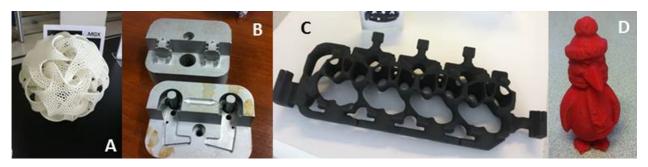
Examples of 3D printed products. (A) A complex decorative piece printed from nylon-11 material using laser based powder bed fusion. (B) Injection molding dies printed out of stainless steel using laser based powder bed fusion. (C) 3D printed automotive cylinder head water jacket sand core printed used binder jetting. (D) A Youngstown State University penguin mascot printed using a desktop material extrusion printer.
